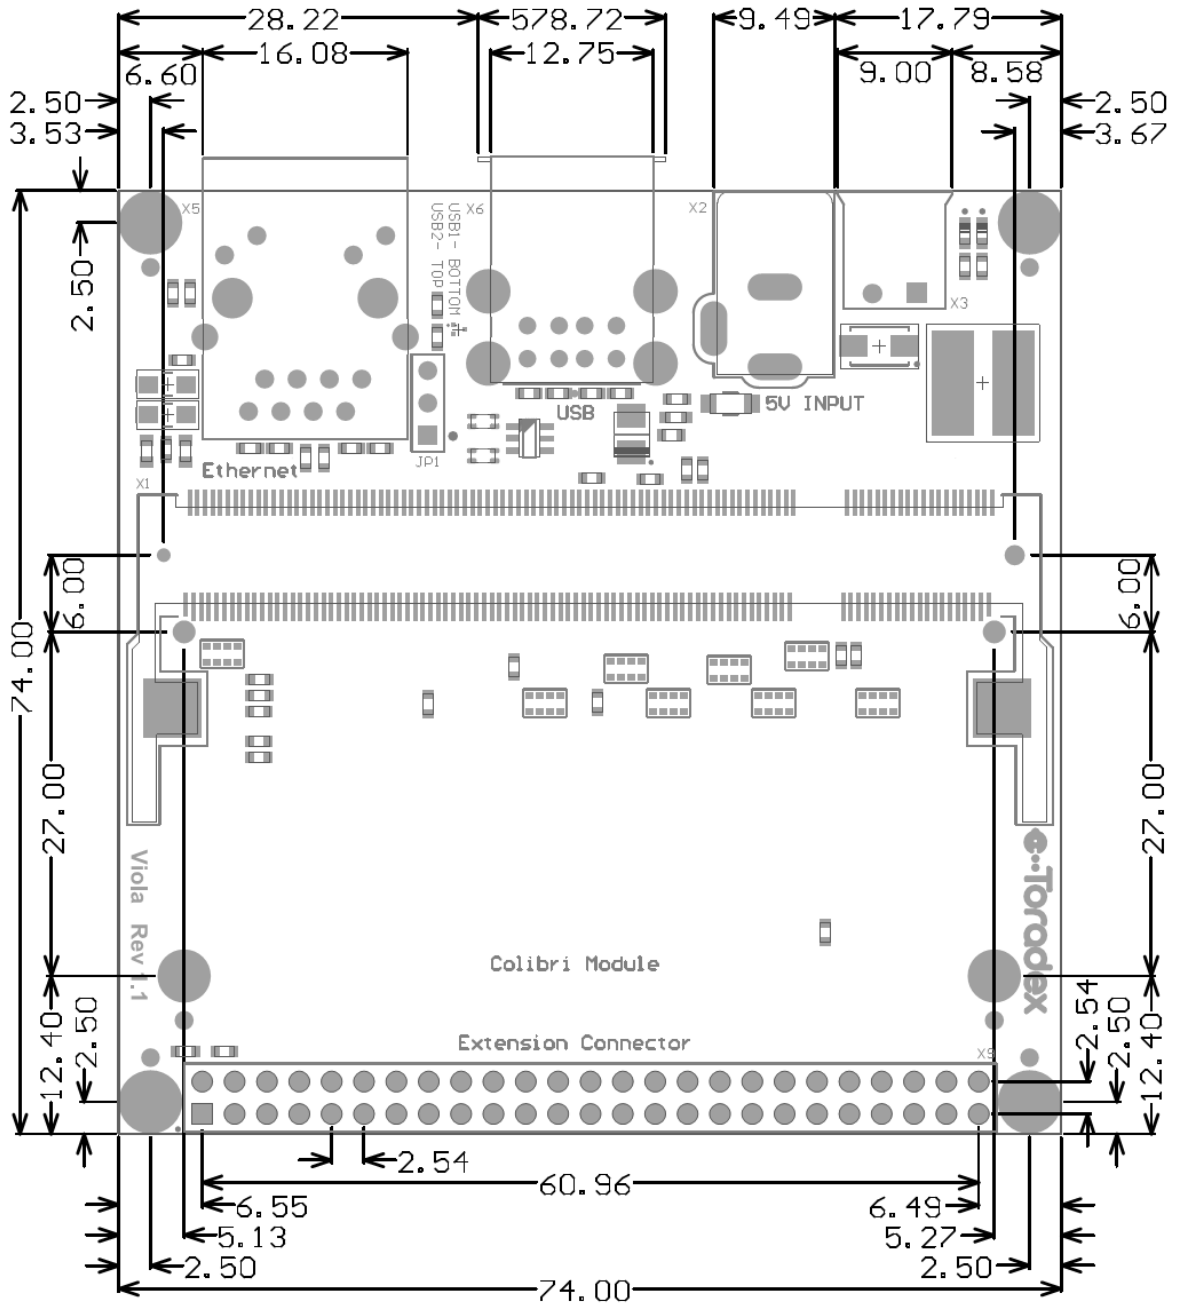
Viola Dimensions – Top Side, all dimensions are in millimetres (mm)
